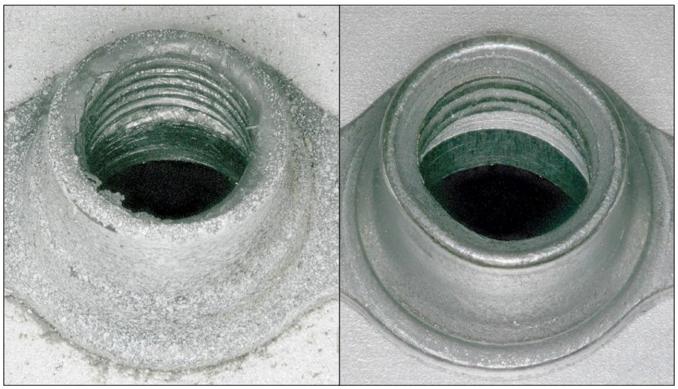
Right aileron inboard hinge nut plate (left) and exemplar nut plate (right).
